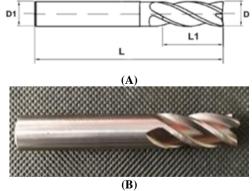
(A) Parallel shank 4F Endmill with designated dimensions [15], (B) Cutting tool used for experimental runs.
